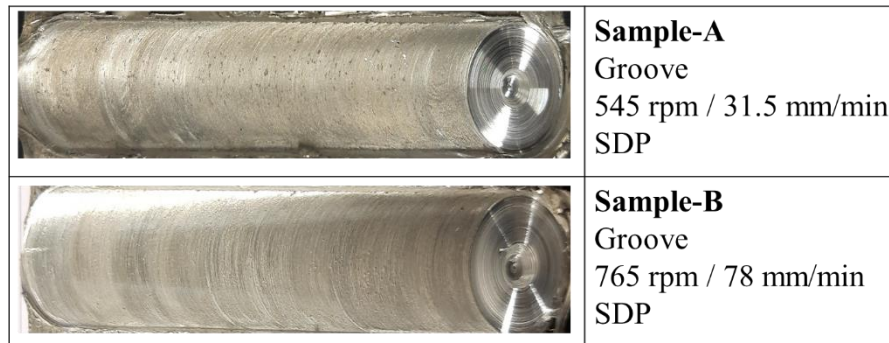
Surface Appearance of the fabricated surface composite using FSP
